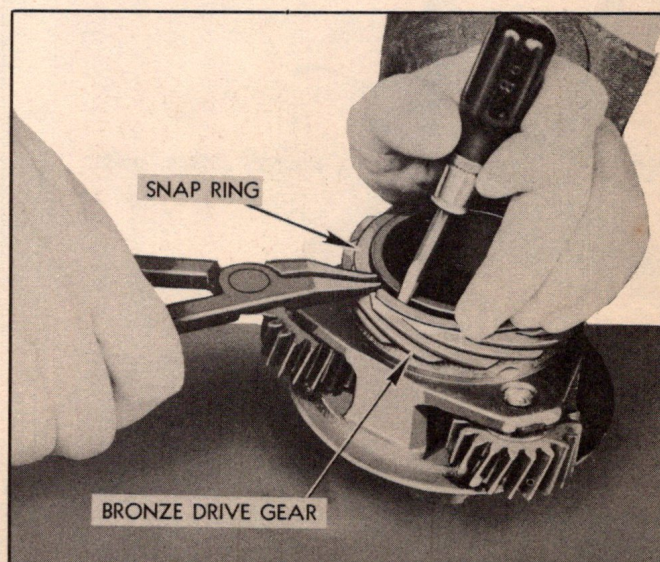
Removing Oil Pump and Governor Drive Gear Snap Ring
